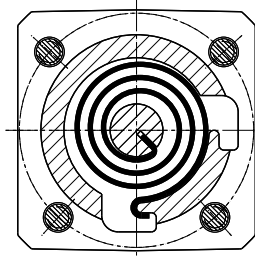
Fitting position of closing springs with "tending side right". (standard version)
